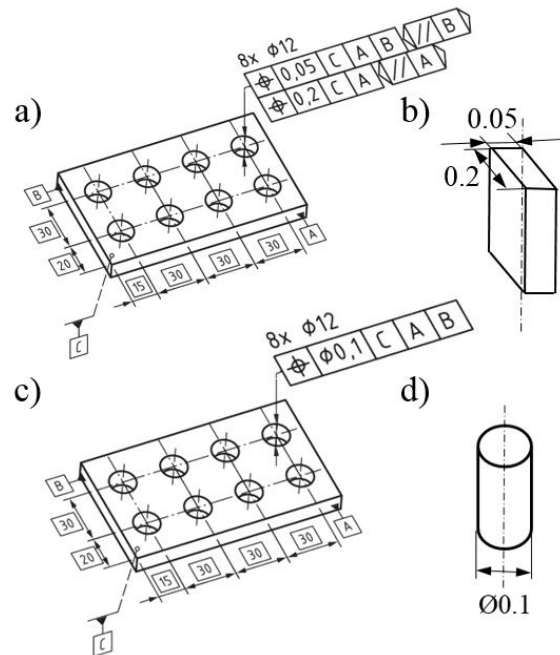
ISO examples for hole axis specification with position tolerance; (a) application of orientation plane indicators; (b) the corresponding tolerance zone is a cuboid with different widths; (c) application of a diameter symbol; (d) the corresponding tolerance zone is a cylinder [1].
